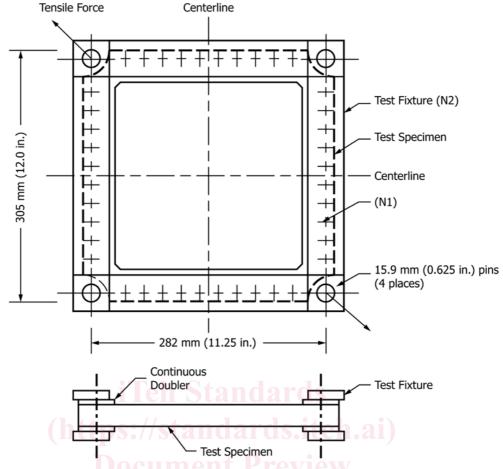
Panel In-Plane Shear Test Specimen and Test Fixture Procedure C shown
